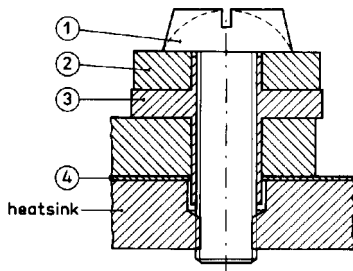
Insulated screw mounting with rectangular washer into tapped heatsink.
